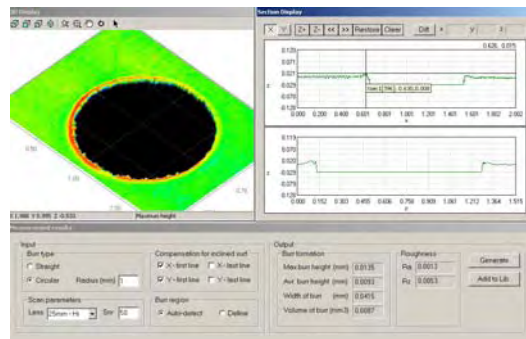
Micro burr in the blanking hole $\varnothing 1\text{mm}$
